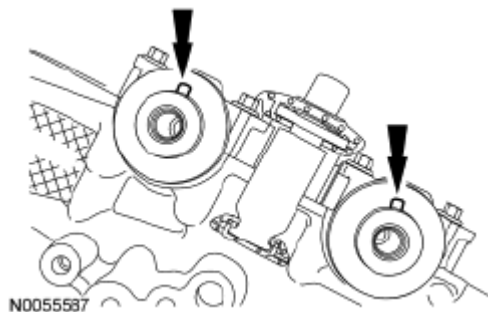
Positioning Camshafts Onto LH Cylinder Head In Neutral Position
